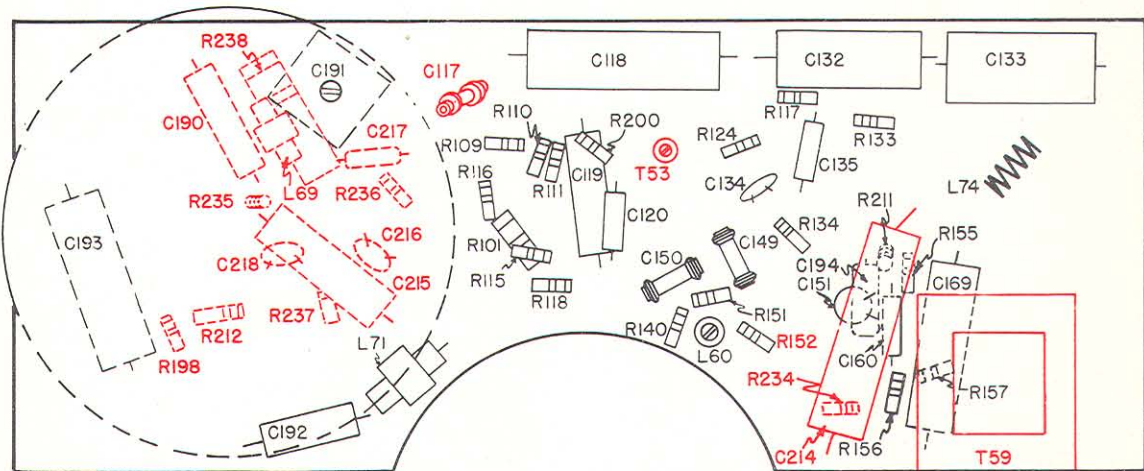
BRIDGE - BOTTOM LAYOUT (B12, B13)
